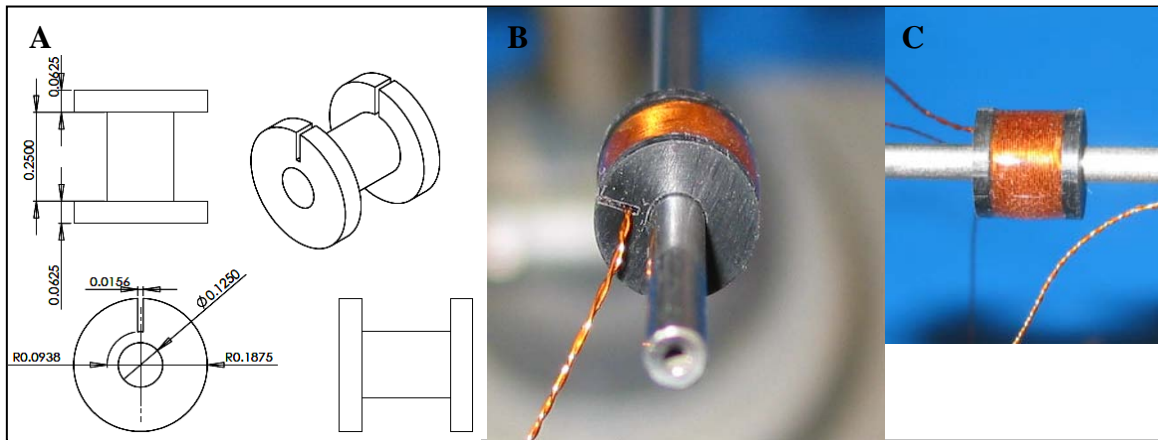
(a) Schematic showing dimensions of Delrin bobbin. (b) and (c) are two different views of sensor threaded through a 1/8 OD, 316 stainless steel tube.
